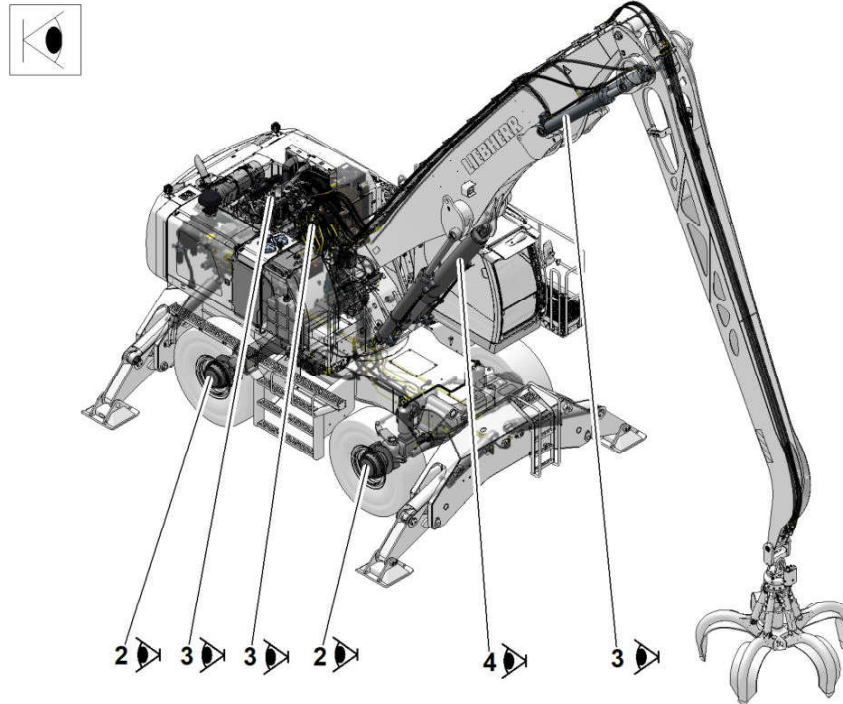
Visual inspection of drive group and hydraulic system
